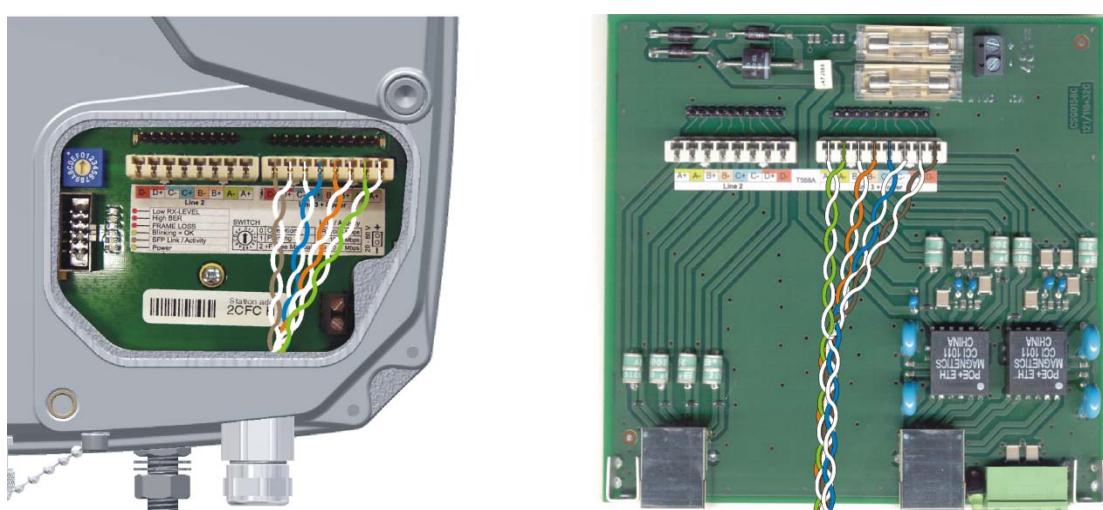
Finished assembly of the connection cable Cat7 S-stp
